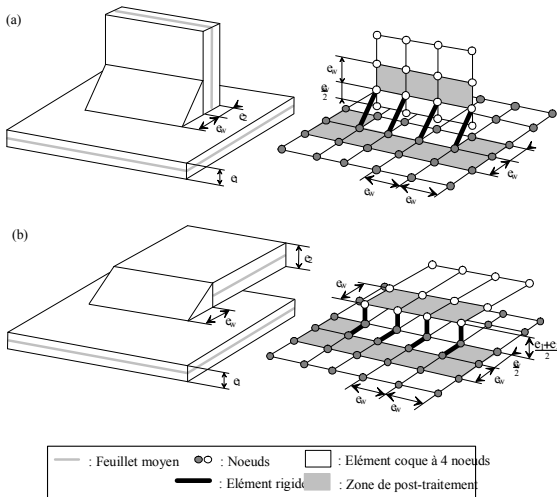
Thin shell modelling (a) for fillet weld; (b) for overlap welded joint.
